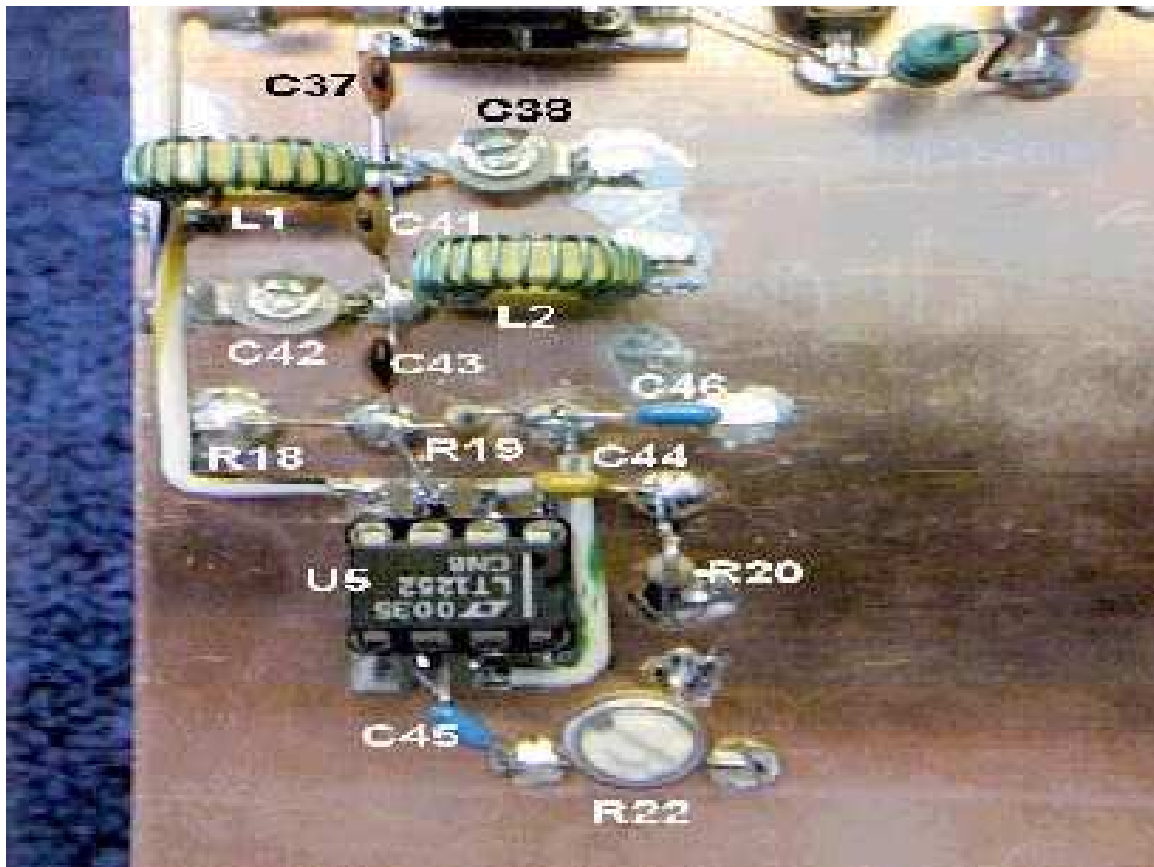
Transmit Bandpass Filter and Driver Parts Layout
